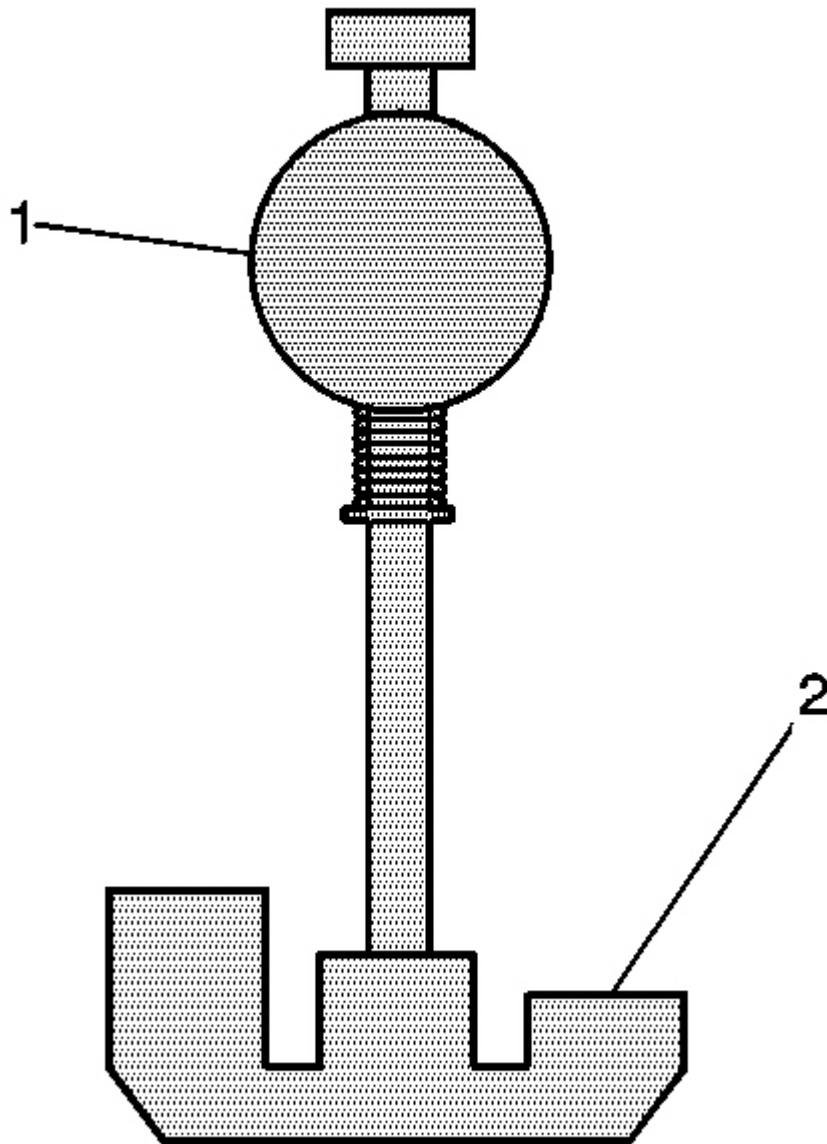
Aligning Plunger Of J 21777-1 To J 21777-85
